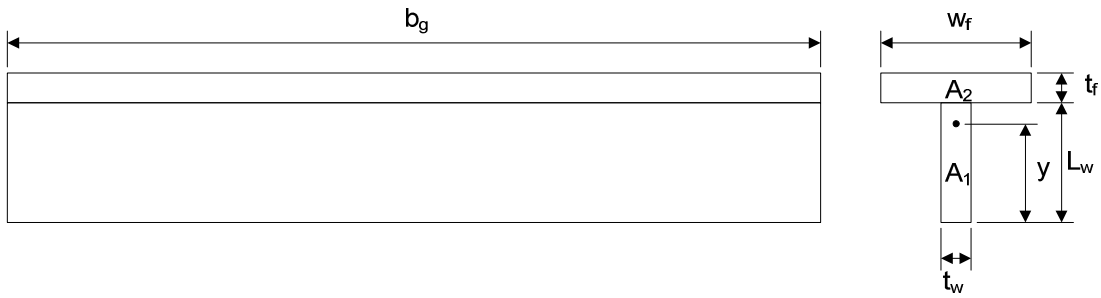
Cross section of T section in upper pivot clamp showing dimensions used in calculations
